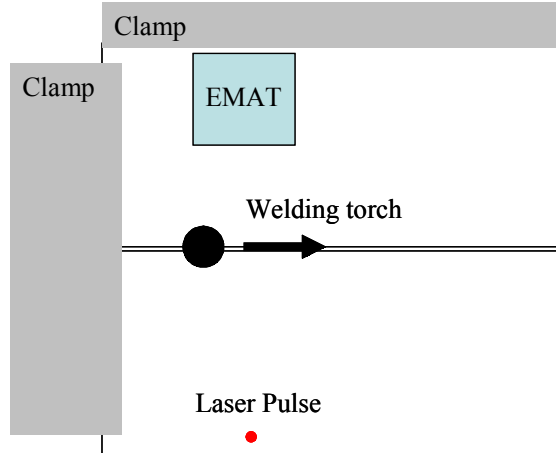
Top view of experimental setup to determine if high temperature gradients effects measured weld penetration depth during welding
